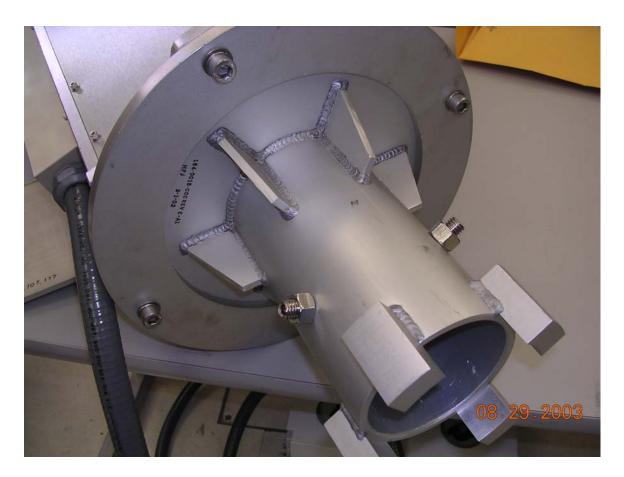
OTU Adapter for Mounting OTU to Upright
